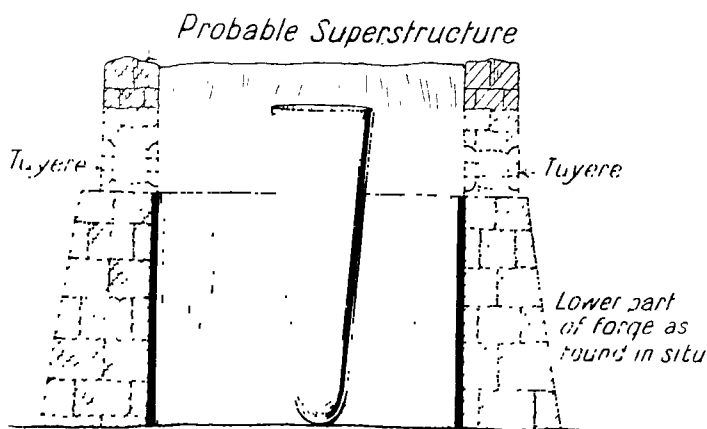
Section through Furnace, showing probable method of forging the mass of Iron
